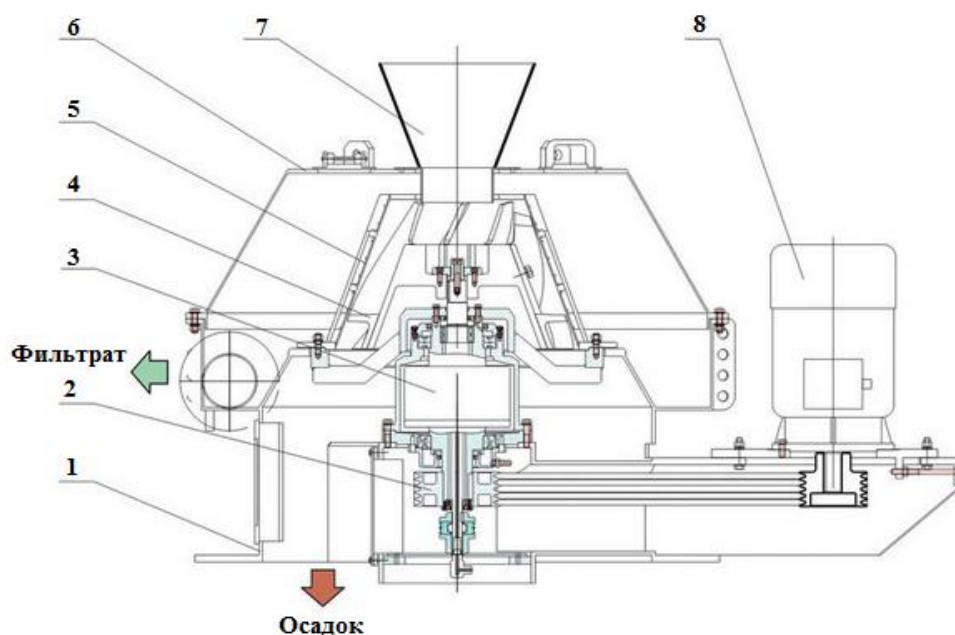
Diagram of a vertical filtering centrifuge with screw discharge of sediment: 1 - frame; 2 - drive; 3 - gearbox; 4 - spiral scraper; 5 - filtering surface; 6 - case; 7 - loading hopper; 8 - electric motor
